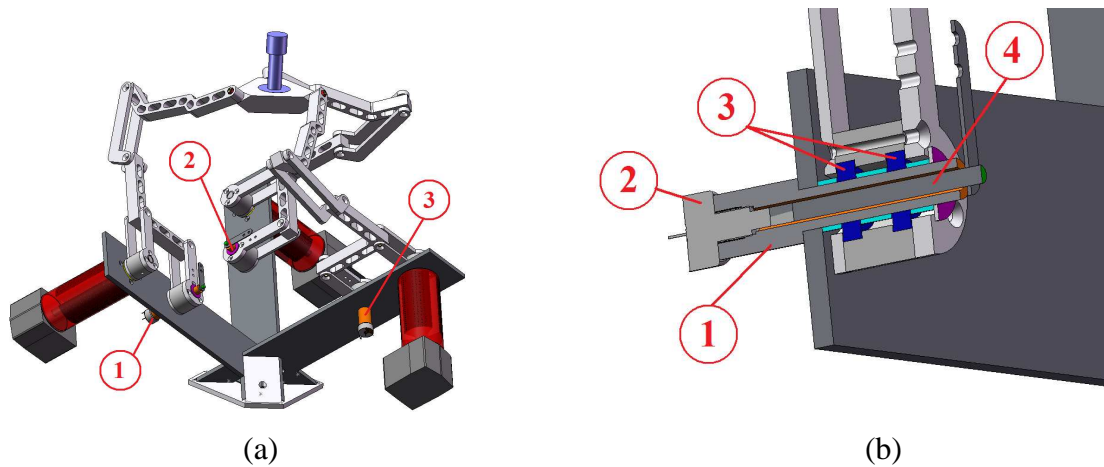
Sensor locations and sensor housing designs: (a) Location of the sensors, (b) The design of the sensor housings
